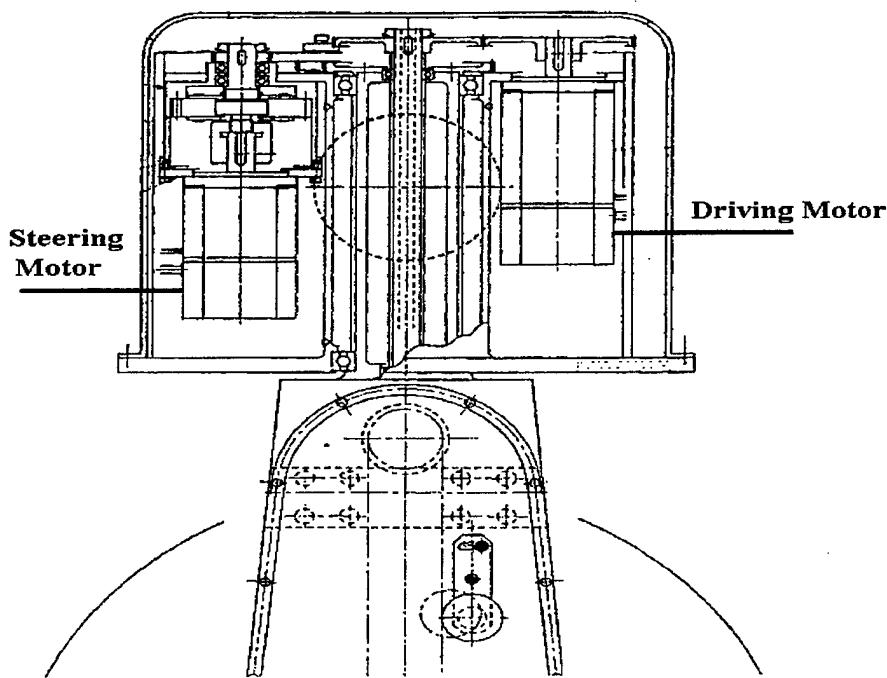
Side cut away of the motors and gears used in the Shepherd driving and steering mechanism (diagram not to scale).
